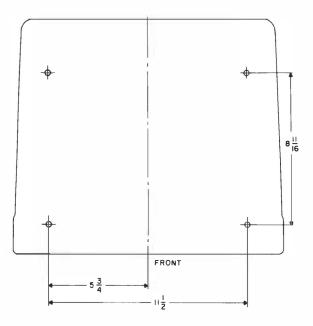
Tactical Case CY-2976A/PG, Low Vibration Installation, Mounting Holes Location
